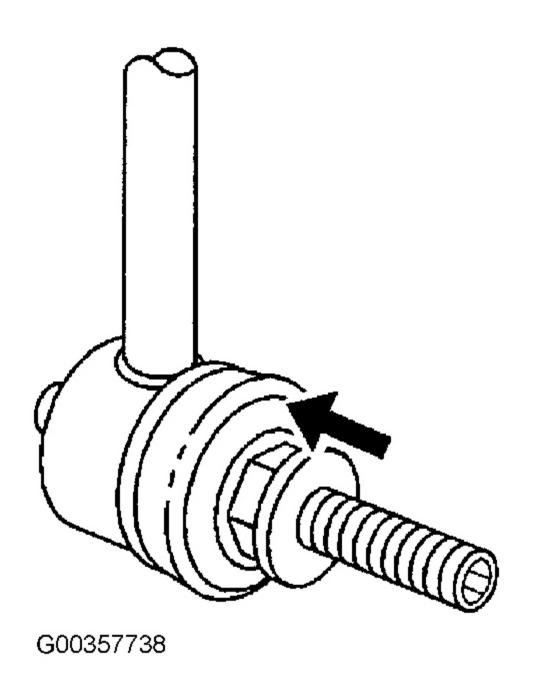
Identifying Stabilizer Shaft Link Nut To Ball Stud Courtesy of GENERAL MOTORS CORP.
